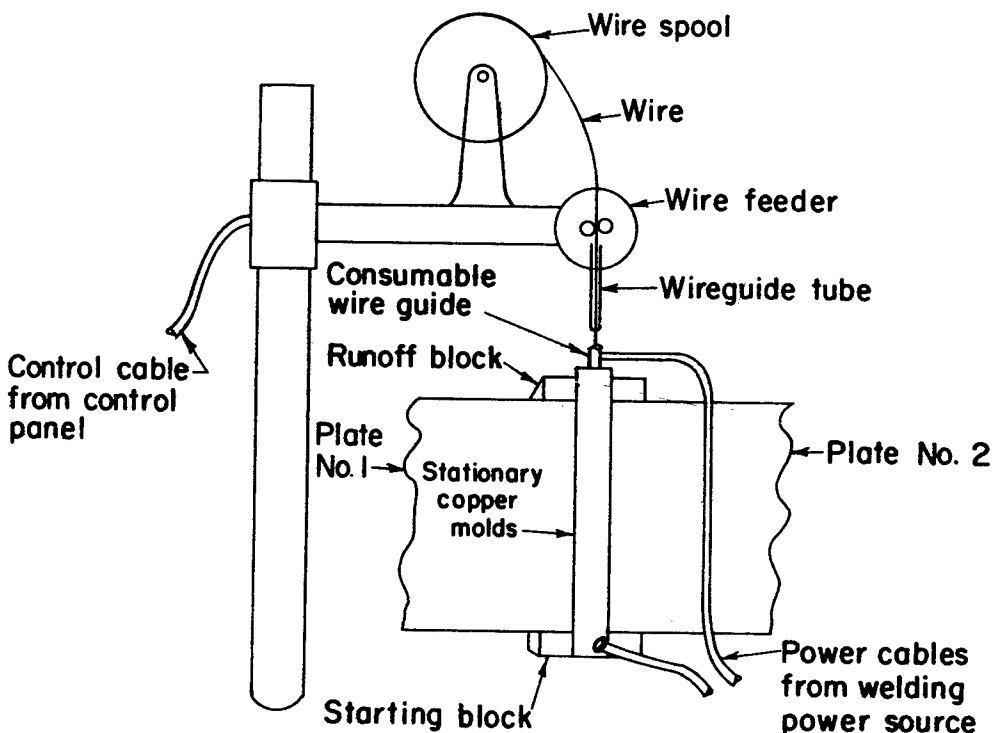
VERTICAL SUBMERGED-ARC WELDING EQUIPMENT
